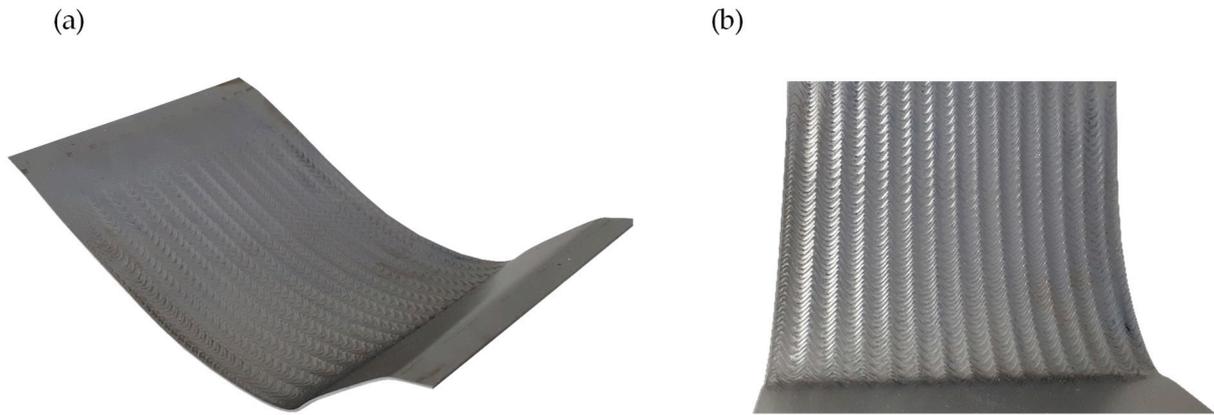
(a) Side view and (b) top view of samples formed by wave-shaped tool path strategy.
